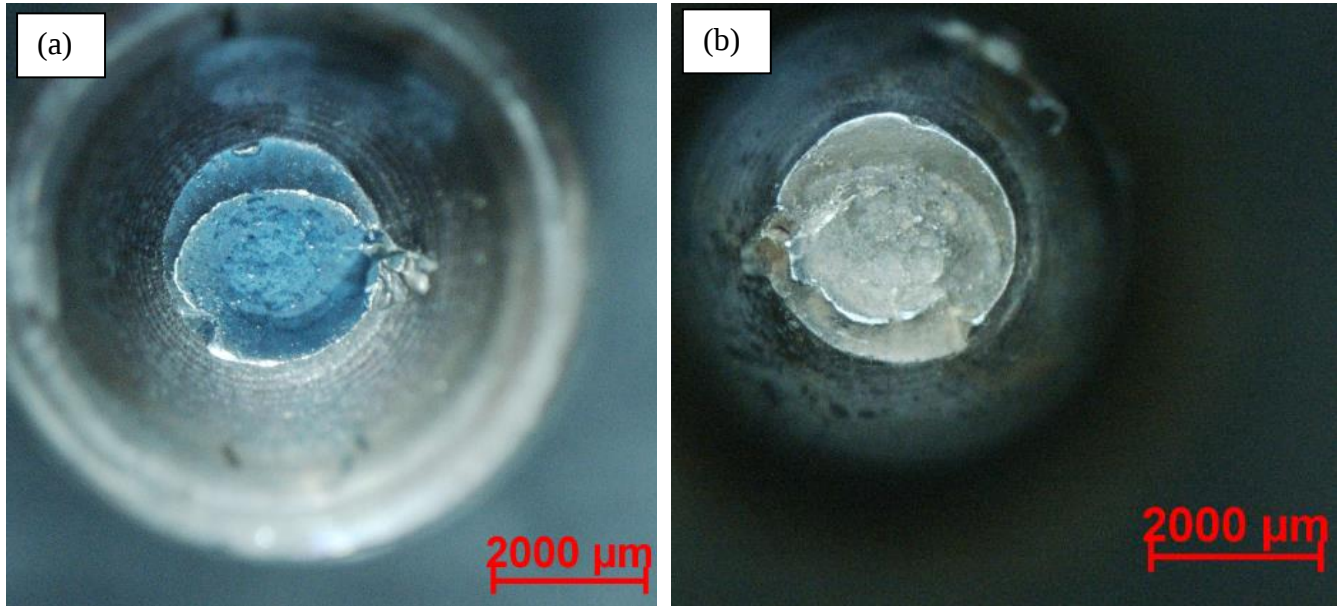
Fracture surface stereo image of the 550°C hot tensile tested specimen showing cup and cone shape with dull (greyish) colour appearance (a) Fractured half sample (towards X20 PM side, (b) Fractured half sample (towards P91 PM side).
